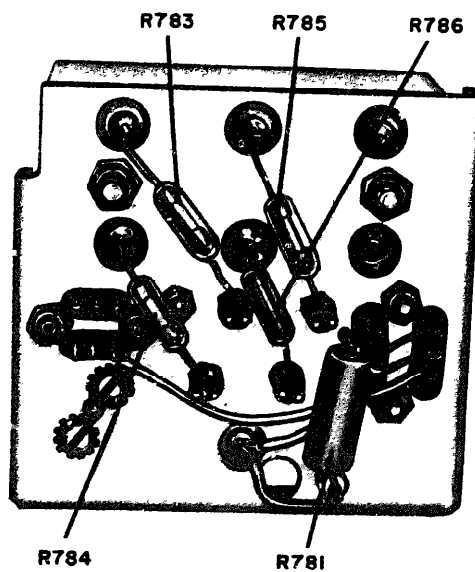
Measuring circuit bracket assembly, bottom view, circuit element location diagram (AM-682A/TCC-3).
